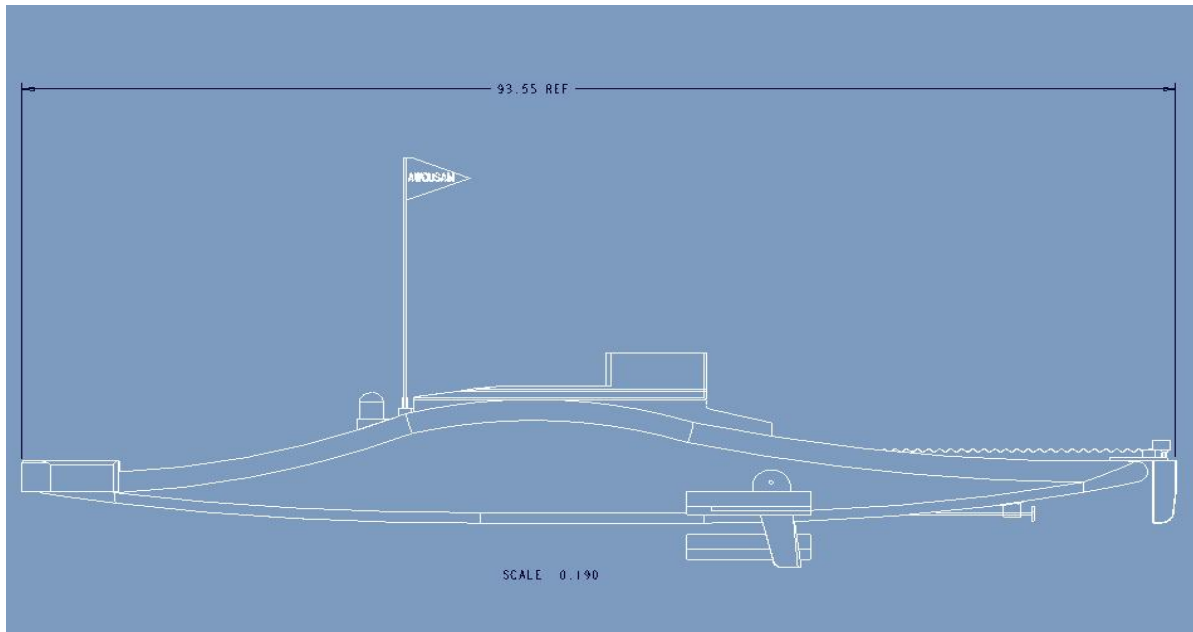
Wire Frame Side View with Dimension (93.55 inches)
